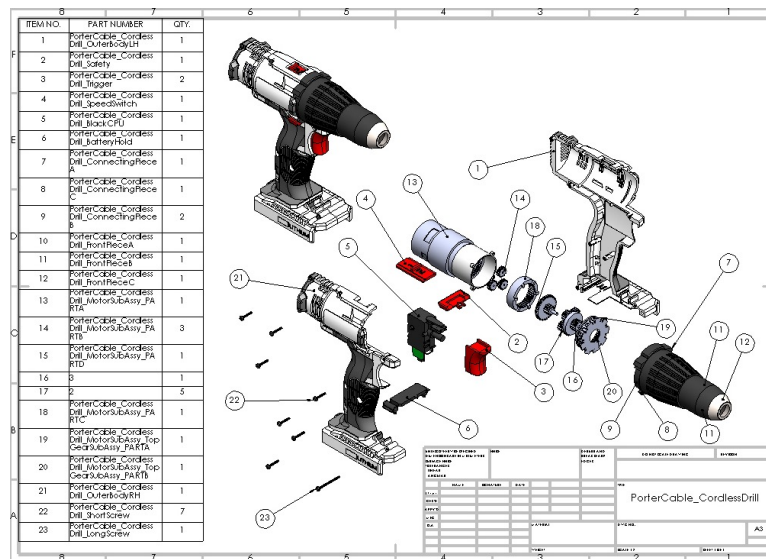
Bill of materials and exploded assembly of the Porter Cable drill
